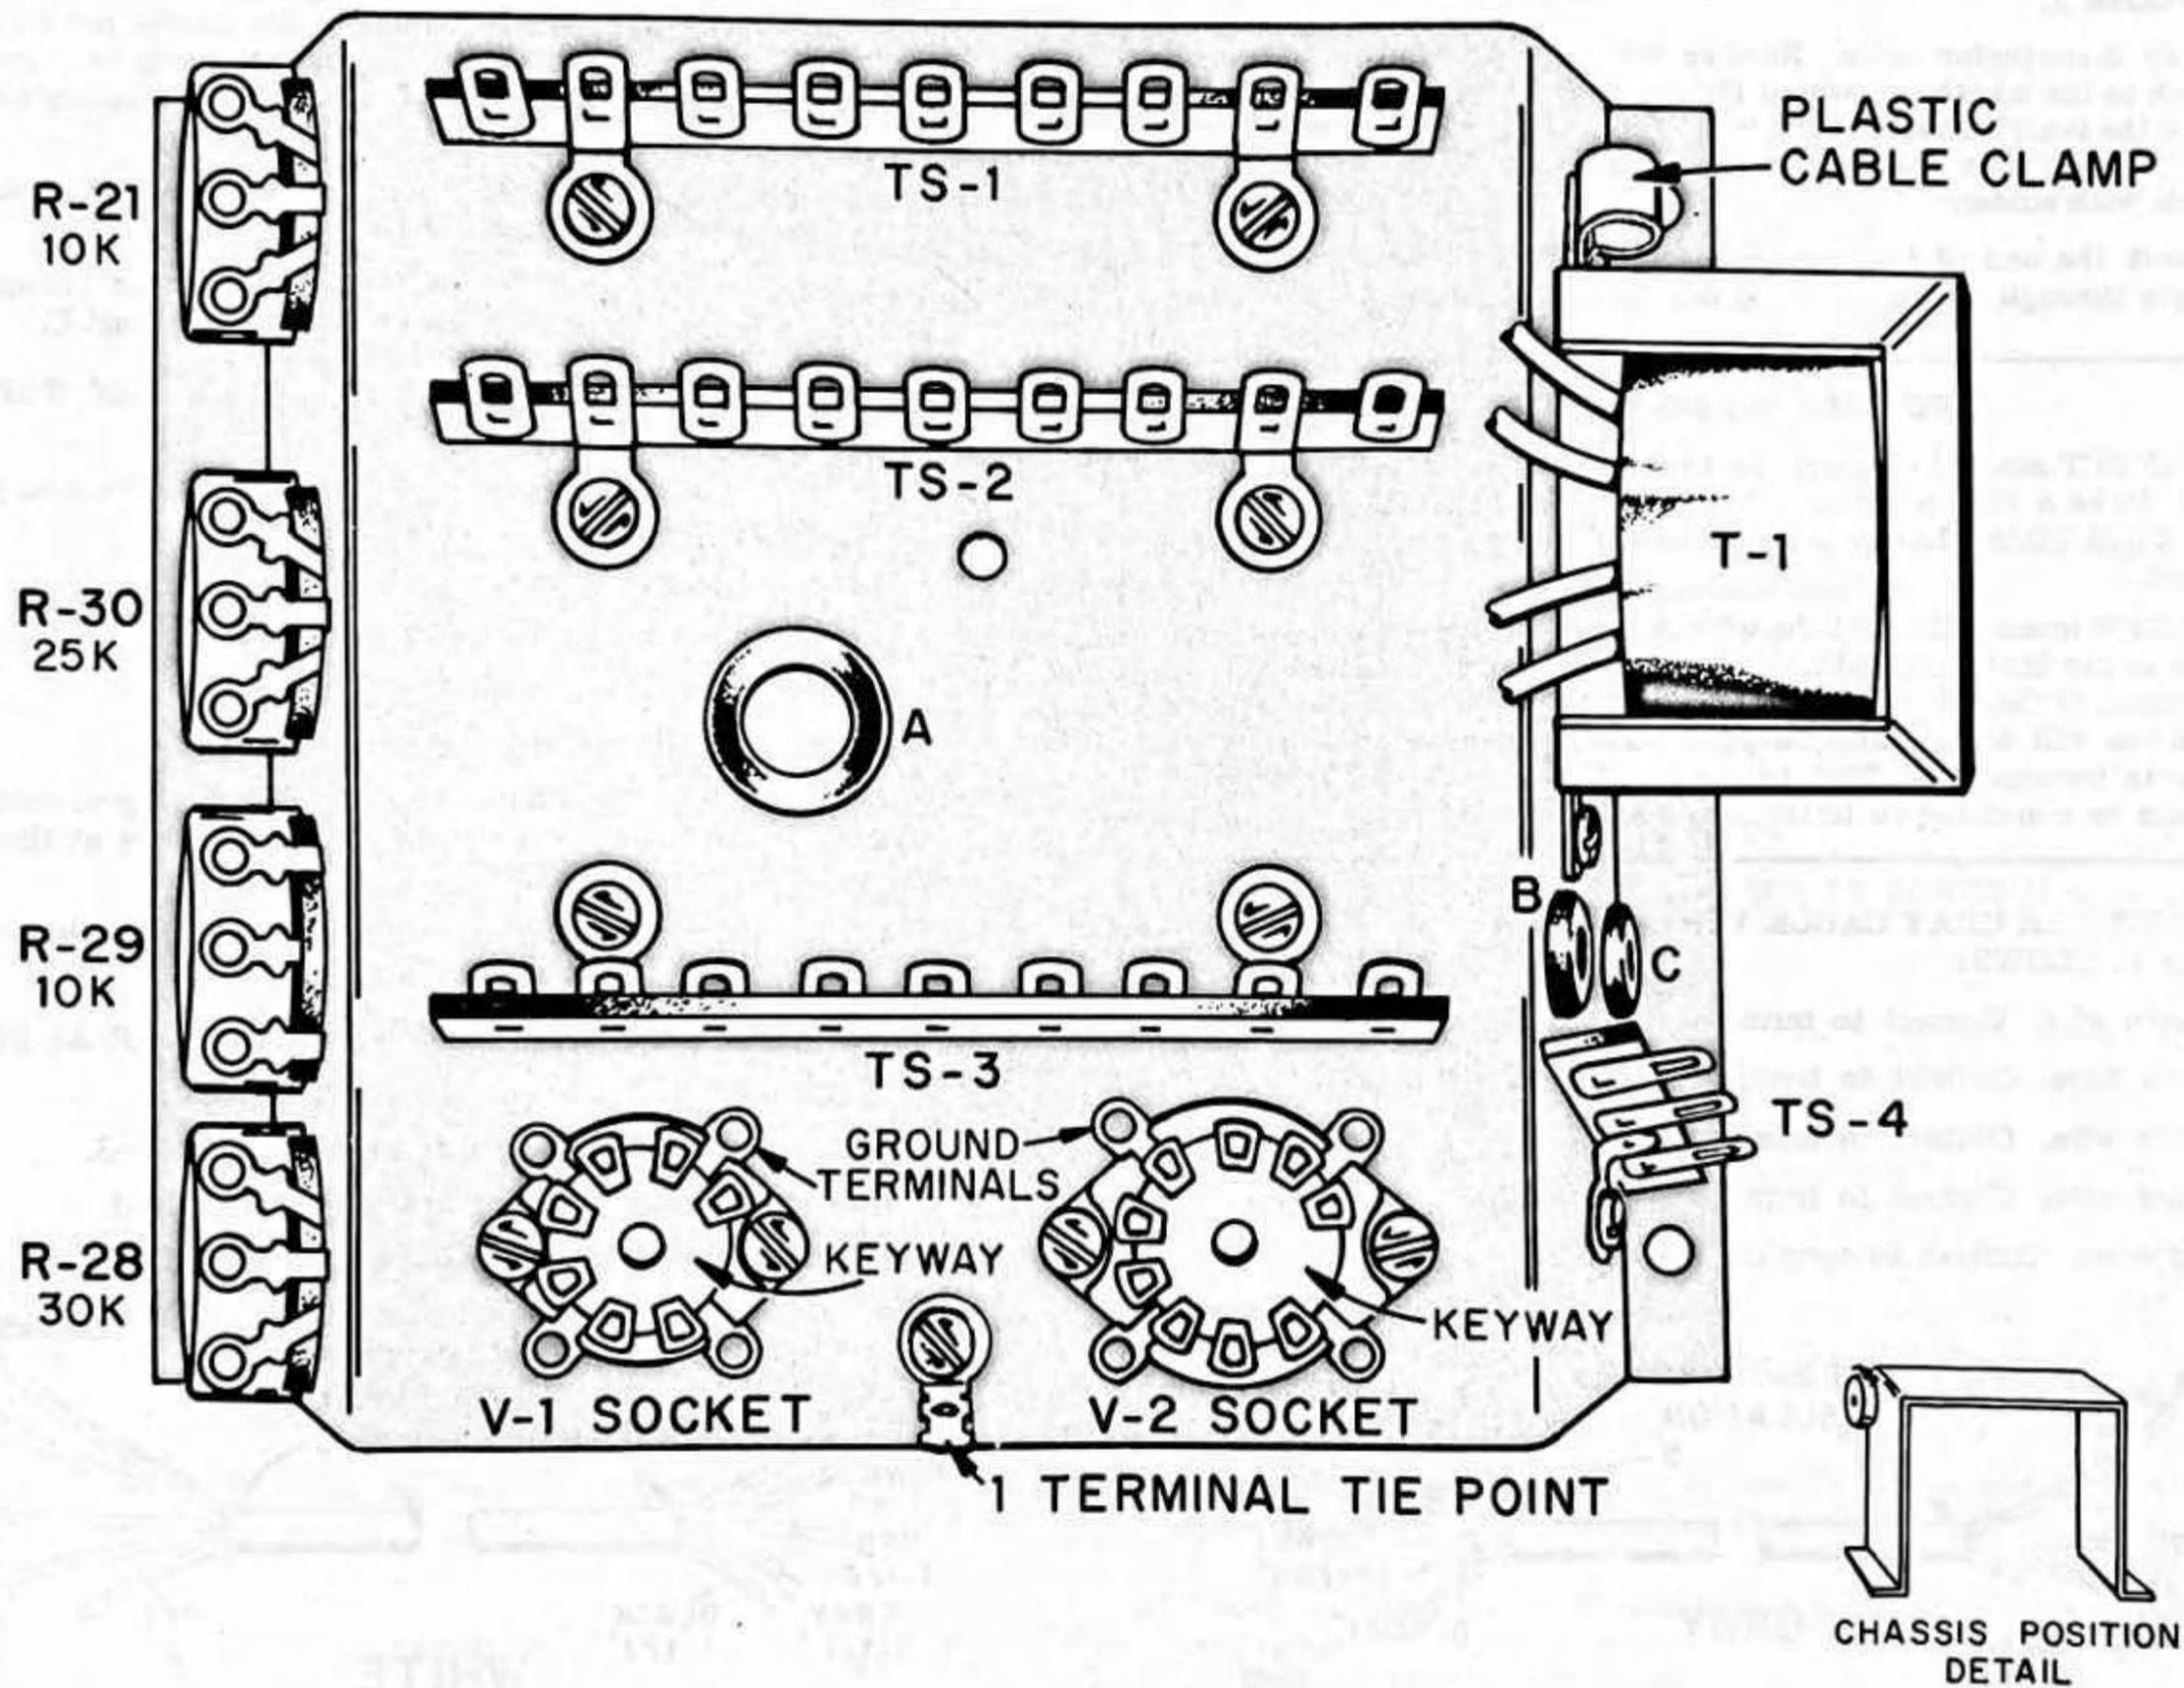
MOUNTING PARTS ON THE CHASSIS
